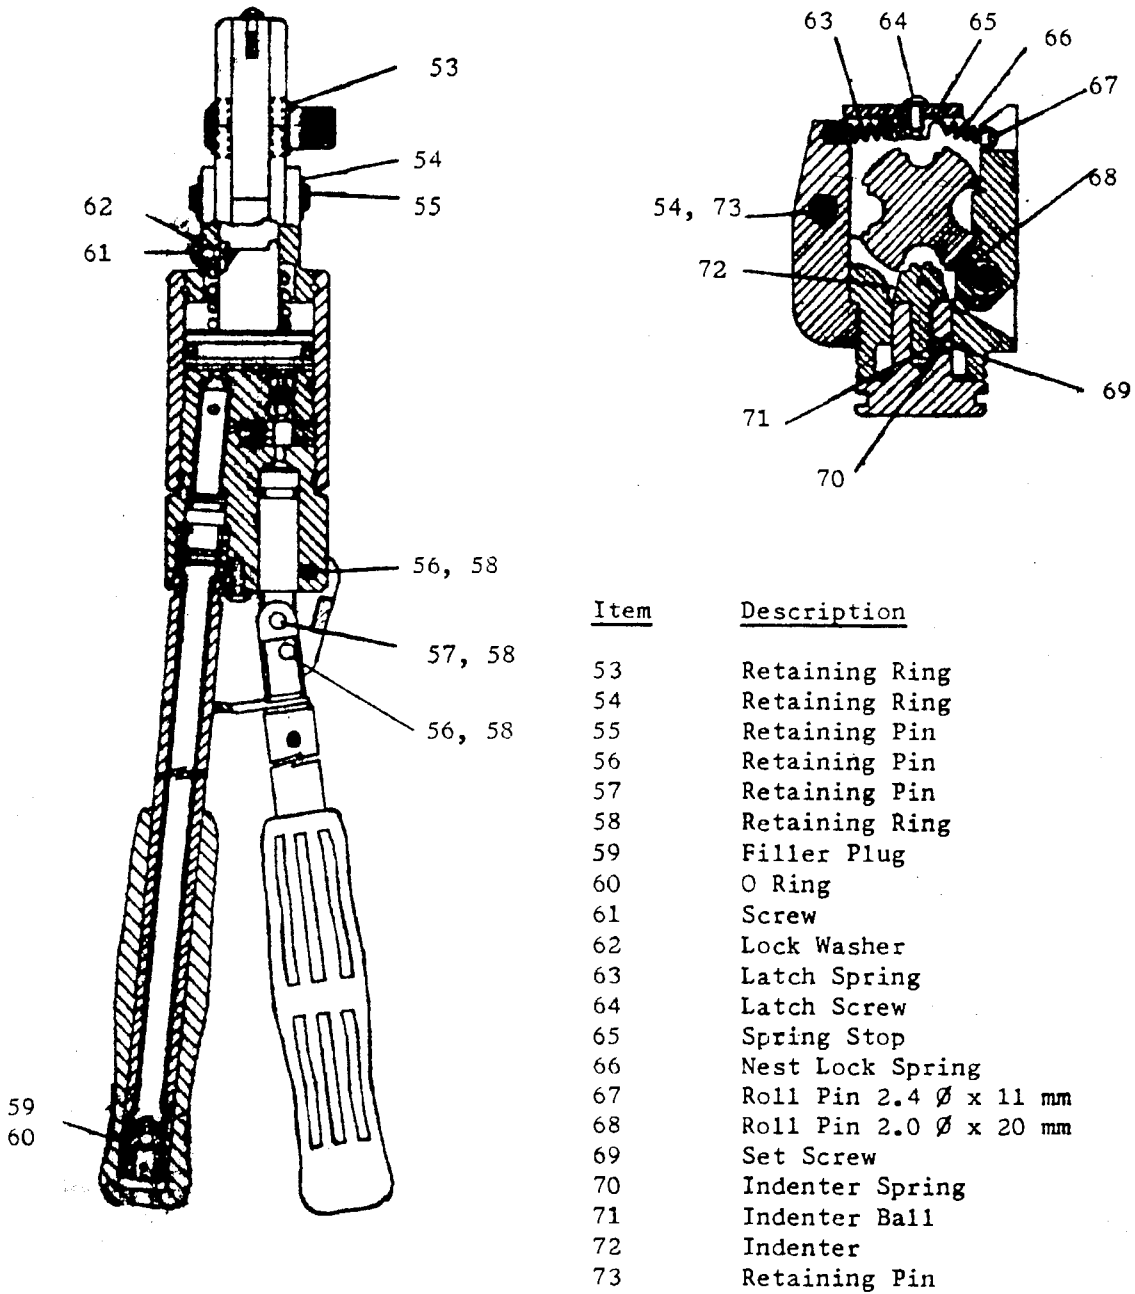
Hand Ratchet Termashield Tool 39/8288
